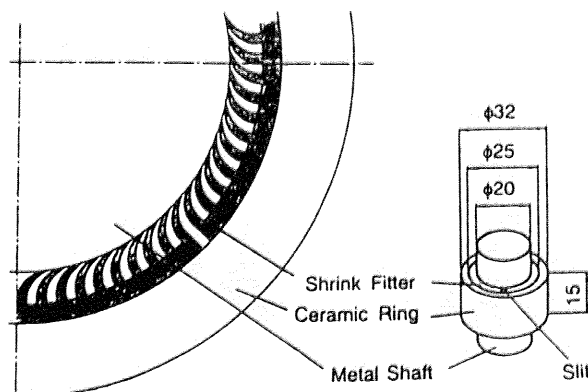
The Shrink Fitted Assembly using a Shrink Fitter
